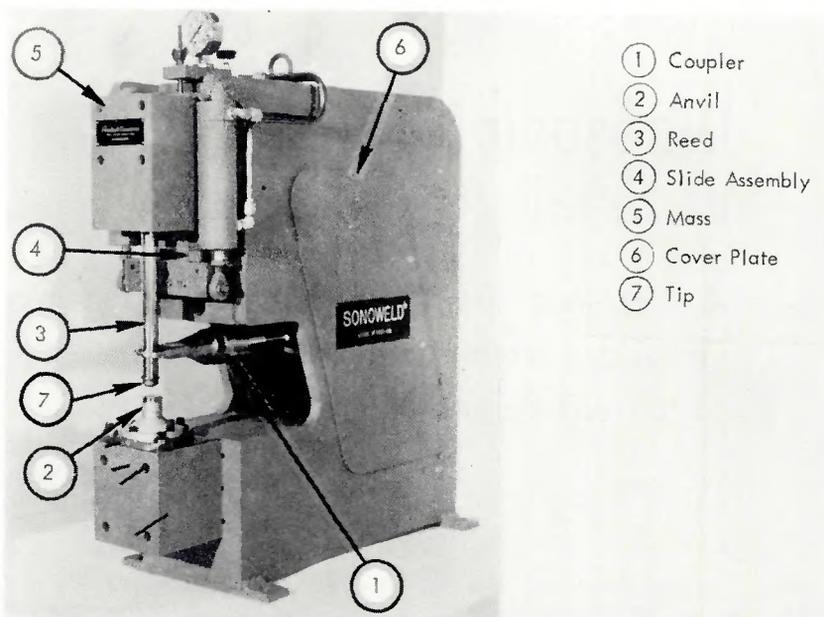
Commercial ultrasonic spot welding machine equipped with a conventional tip and anvil
